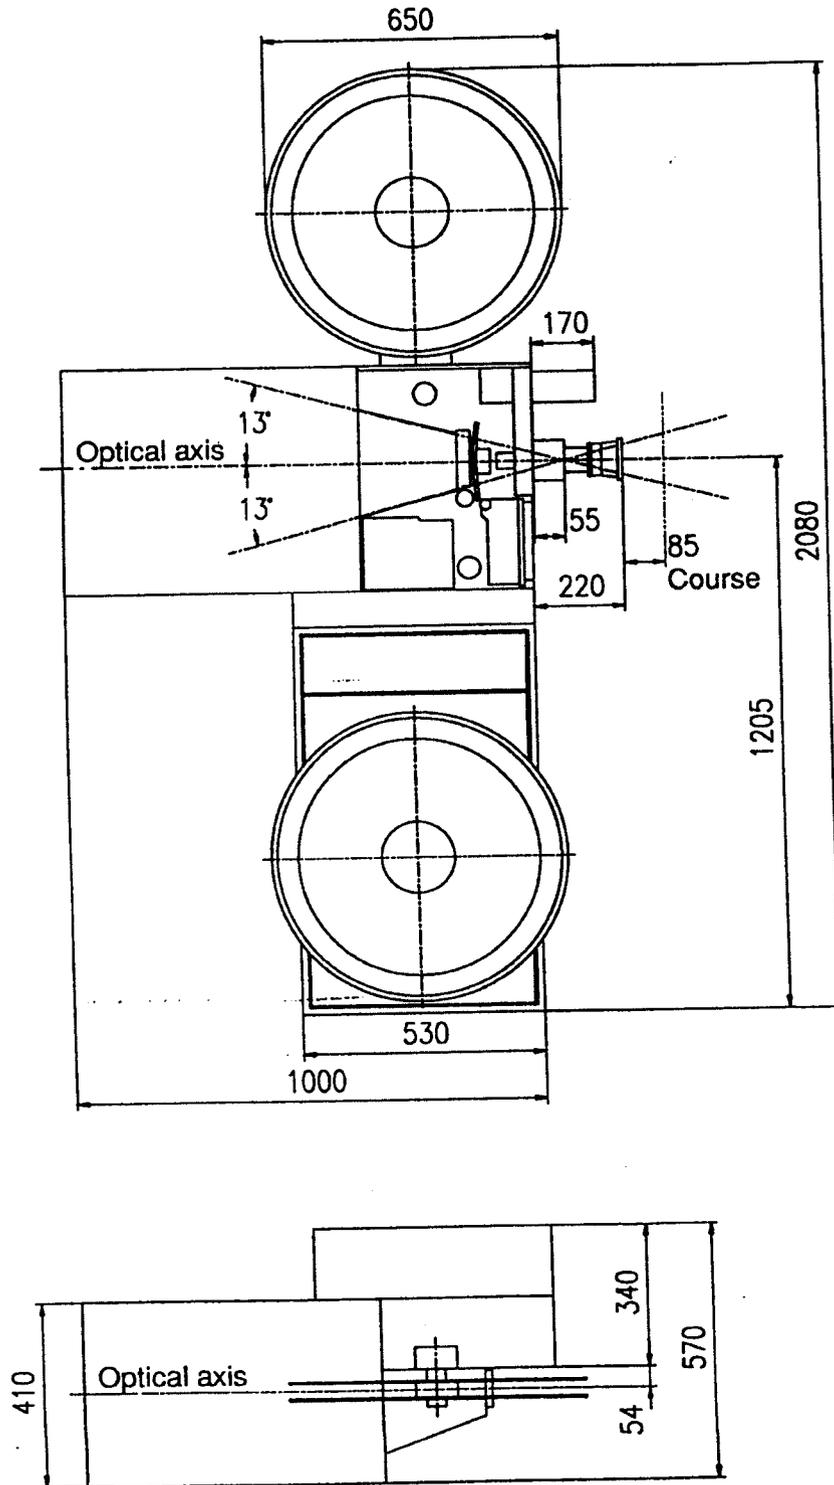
Vertical Friction Assembly, 2000 m – Dimensions in mm –
